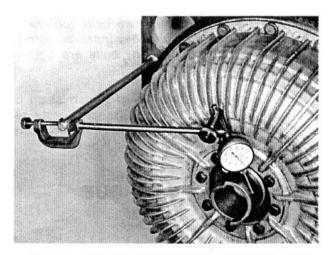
MEASURING IMPELLER HUB "RUN-OUT"
